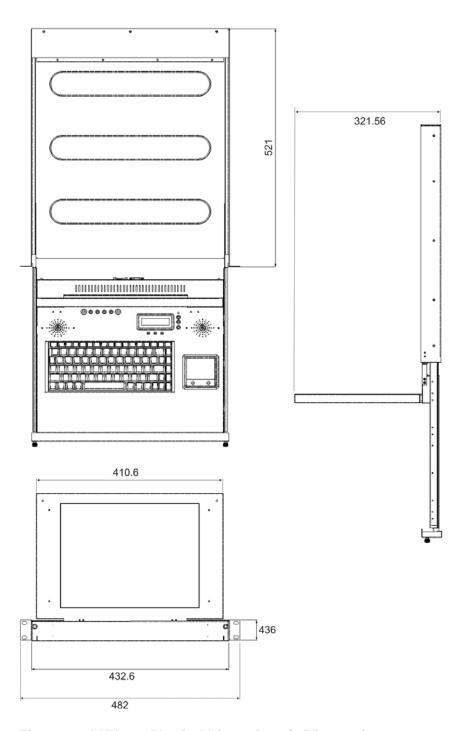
LKM-926 Physical Dimensions (millimeters)
